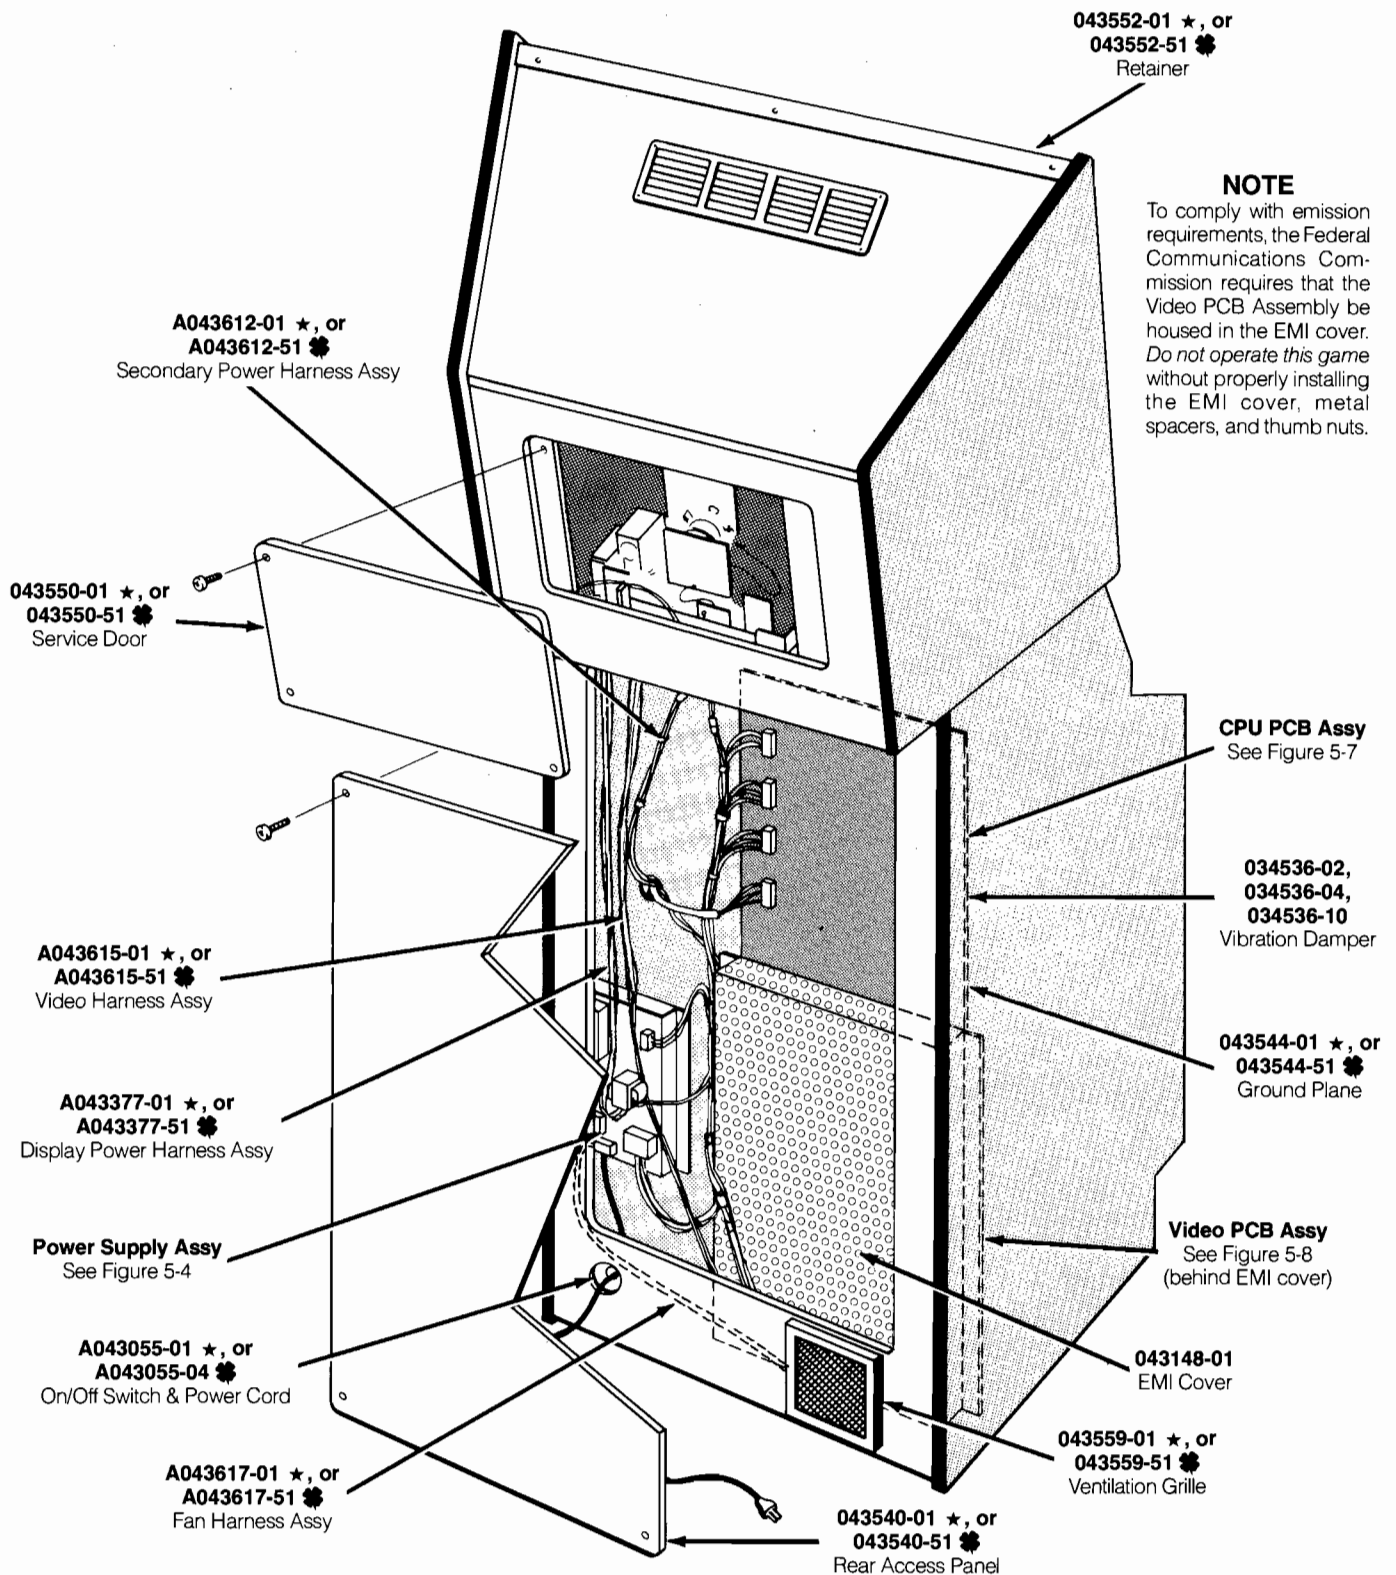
Cabinet-Mounted Assemblies, Continued
